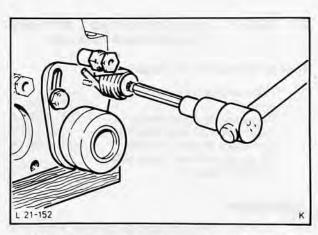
Remove toothed belt tensioner, using Special Tool 21–012
